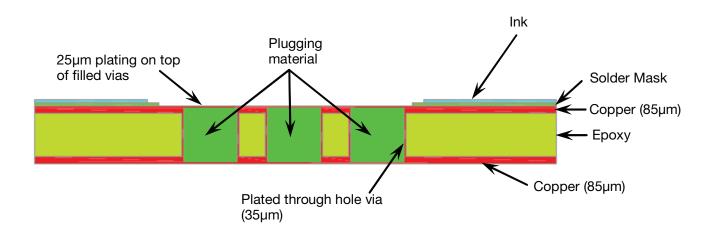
Cross section of FR4 based PCB with filled and capped thermal via for two layer board.
